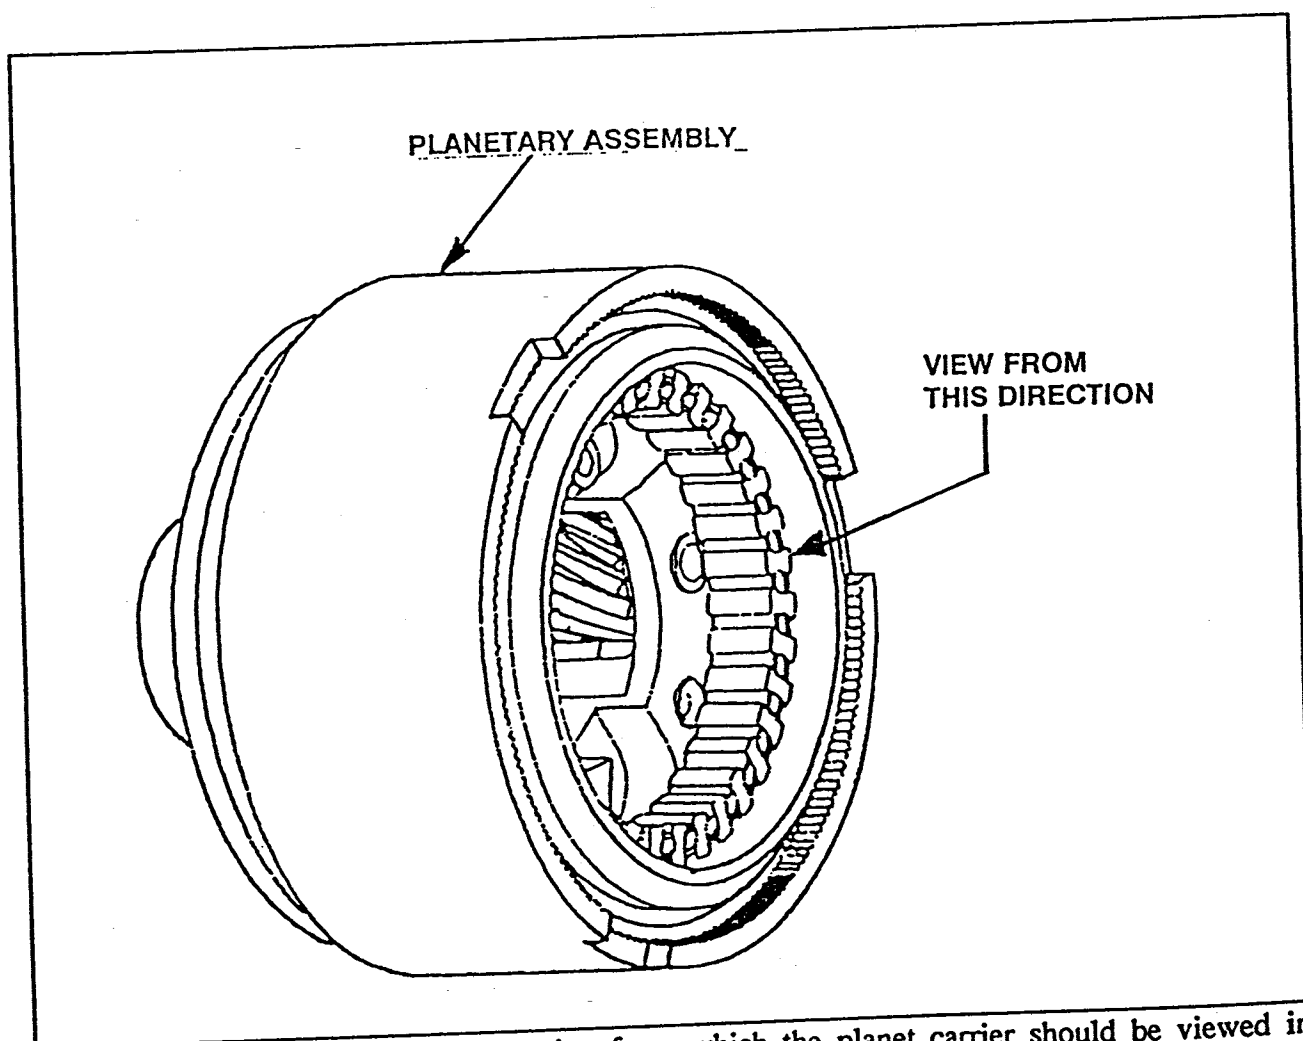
Sketch showing the direction from which the planet carrier should be viewed in order to see the identification grooves on the long pinion.
